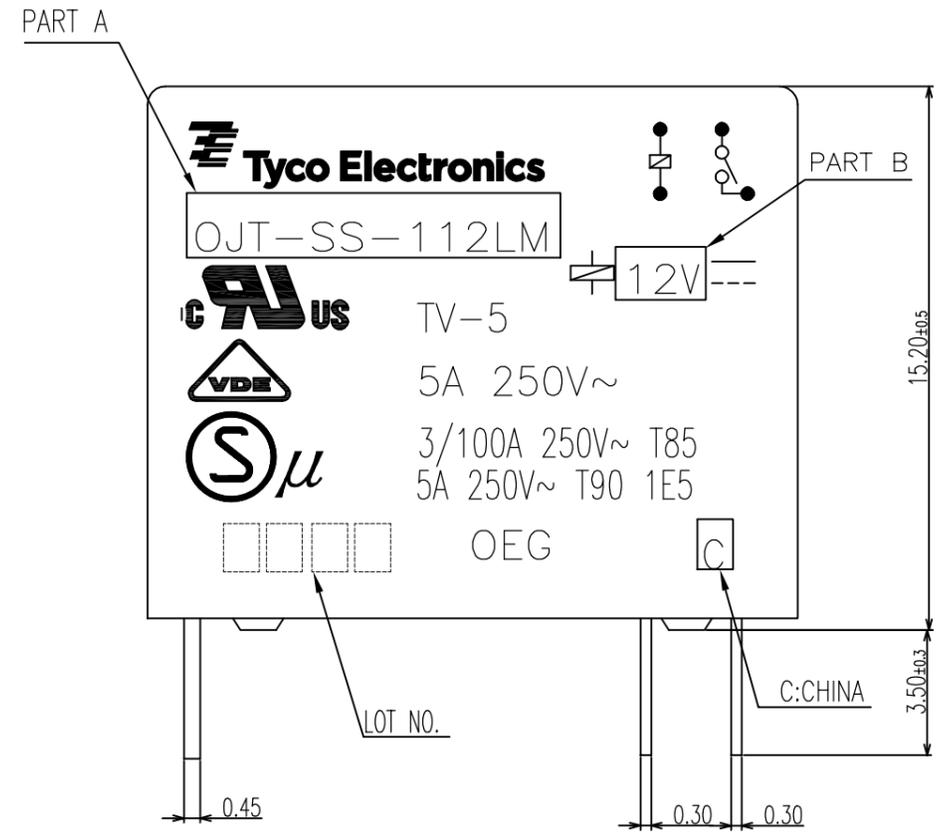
FIGURE FOR PRINTED CIRCUIT BOARD PROCESSING
